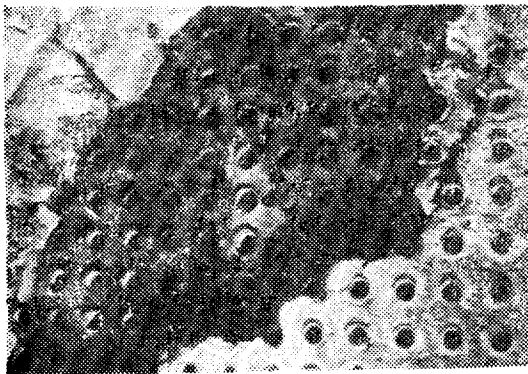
Top Left Hand Quadrant of Inlet Tubesheet, Showing Detached Refractory
